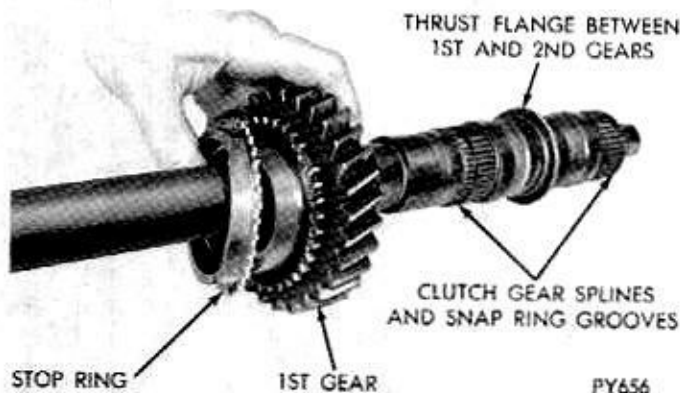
1st Gear and Stop Ring—Removal or Installation
